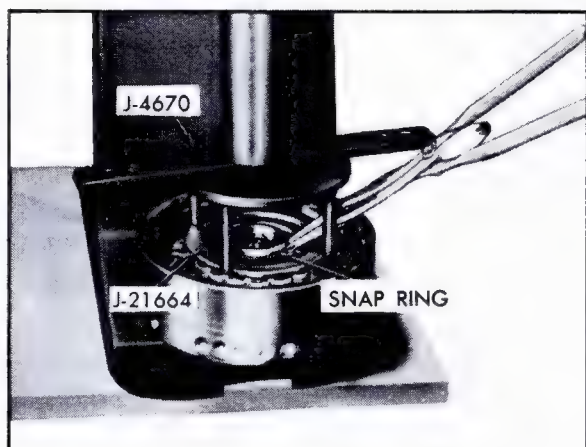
Removing and Installing Forward Clutch Housing Snap Ring
